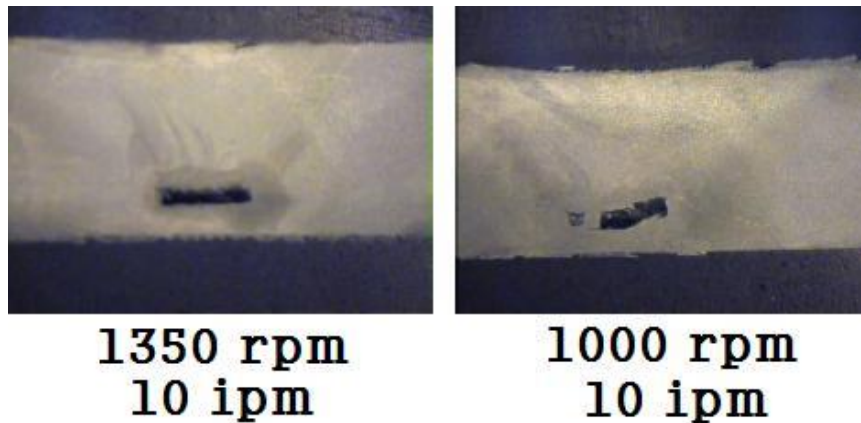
Weld Defects Resulting From Worn Trivex™ Tool
